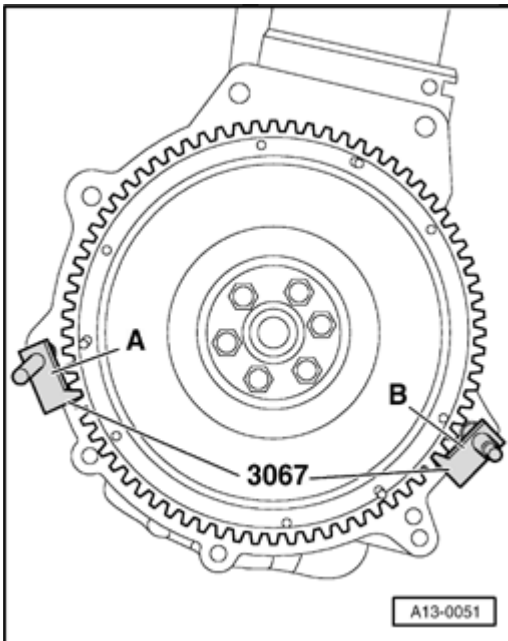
Inserting Retainer 3067 In Hole On Cylinder Block
